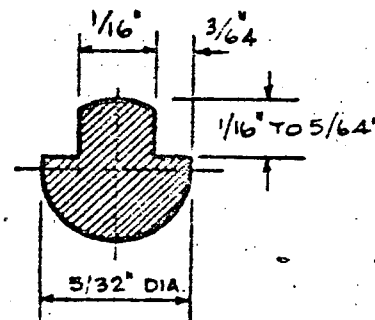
DIMENSIONS OF CONSUMABLE INSERT BACKING RING
